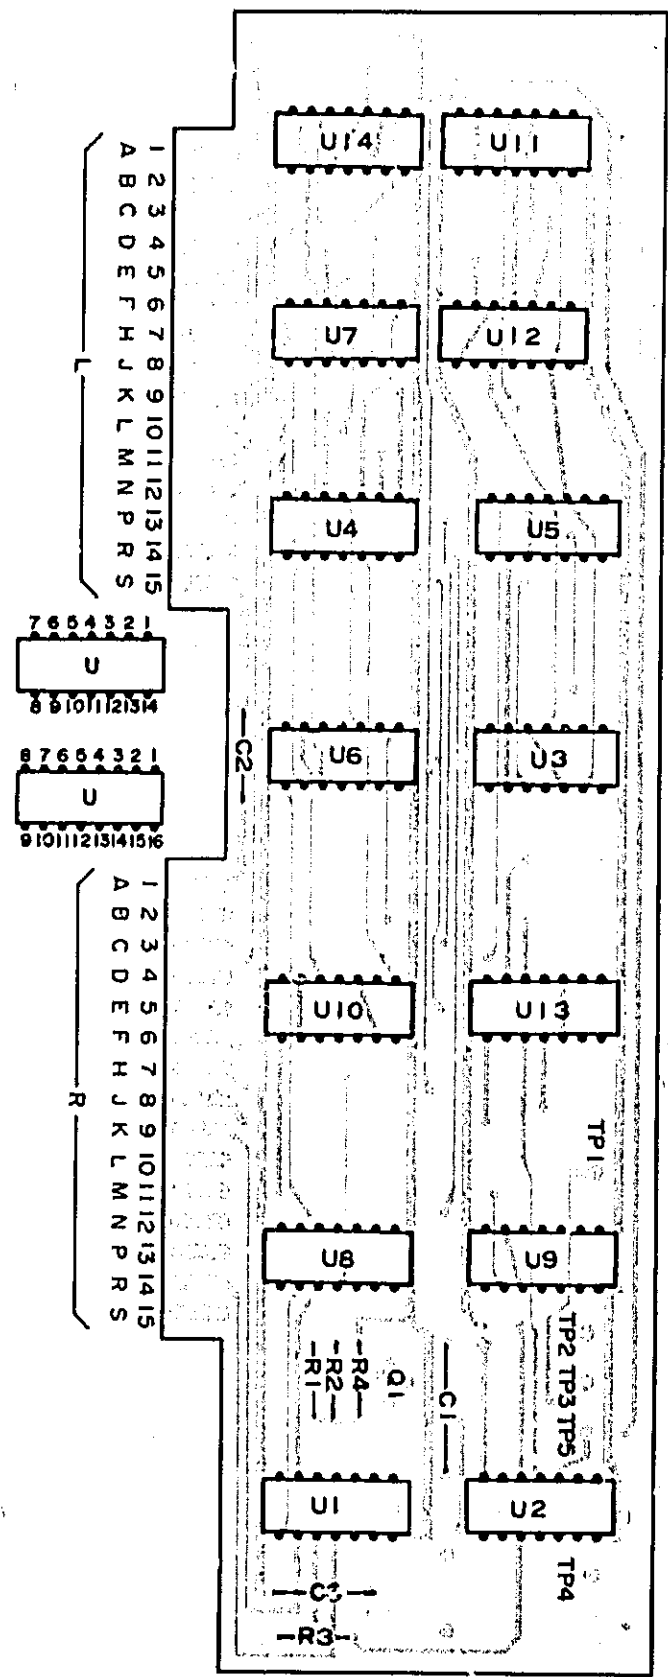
A26 Parameter Serial BCD Output Control Board Assembly Component Locations.
